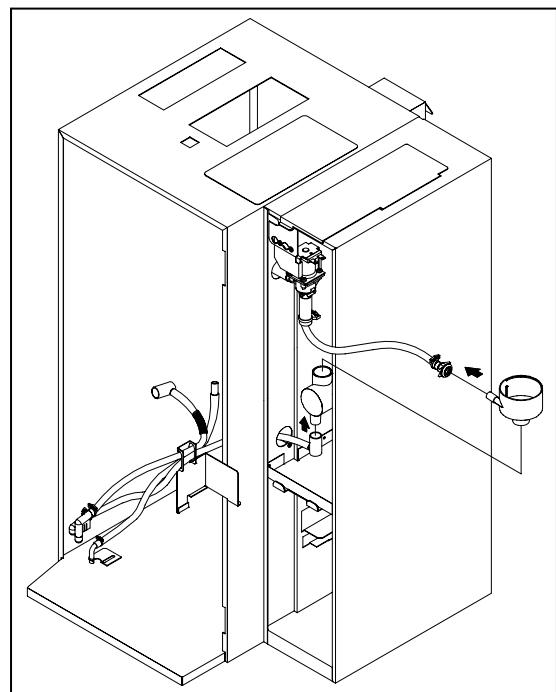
Connect the hoses inside the A.P.P. (door is removed from illustration to simplify parts identification).
